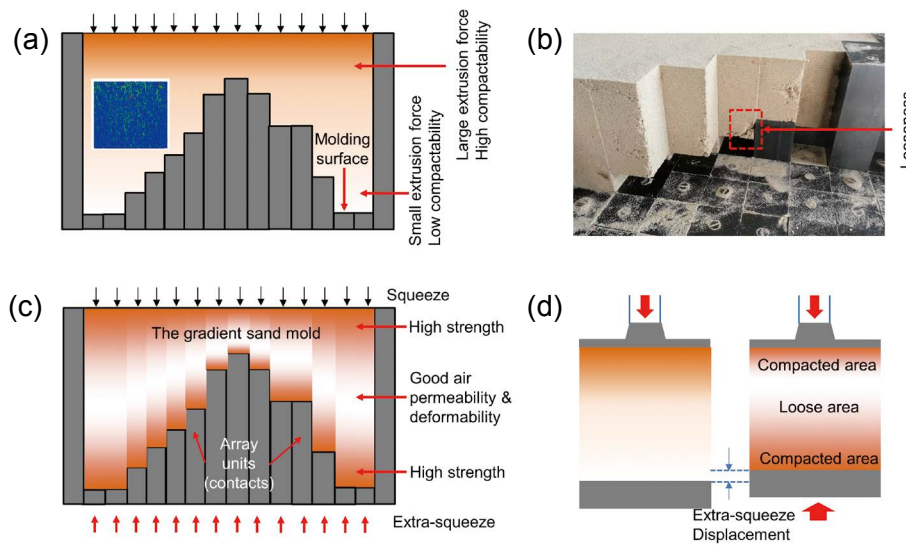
Improvement for the near-shape process of sand mold: (a) single-side squeeze; (b) looseness at bottom and edges of the sand mold; (c) extra-squeeze method of the gradient sand mold (double-side); (d) extra-squeeze of a contact and gradient sand structure
